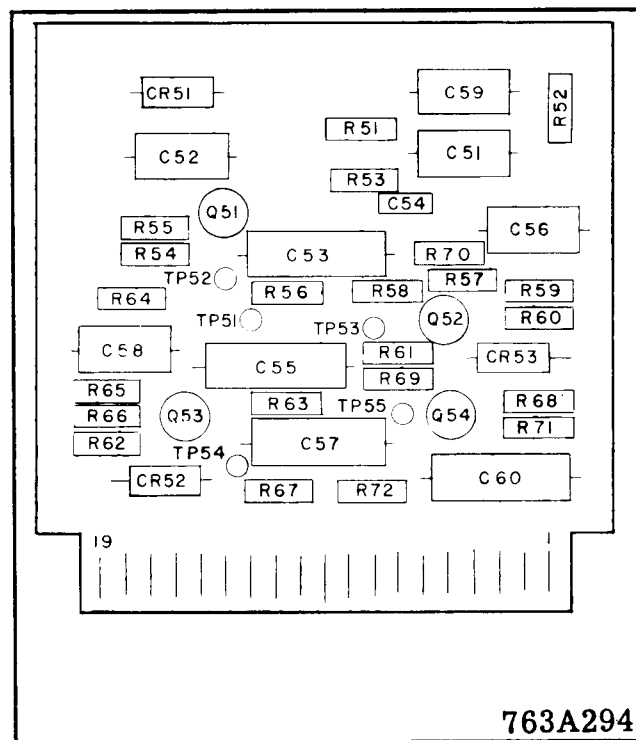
Component locations on the amplifier and limiter printed circuit board.
